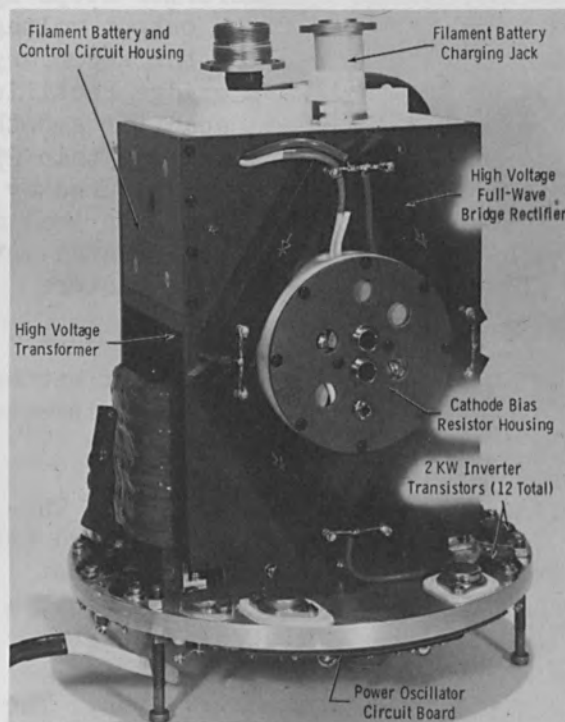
The power supply of the laboratory welding device illustrating some of the inverter and high voltage components.
